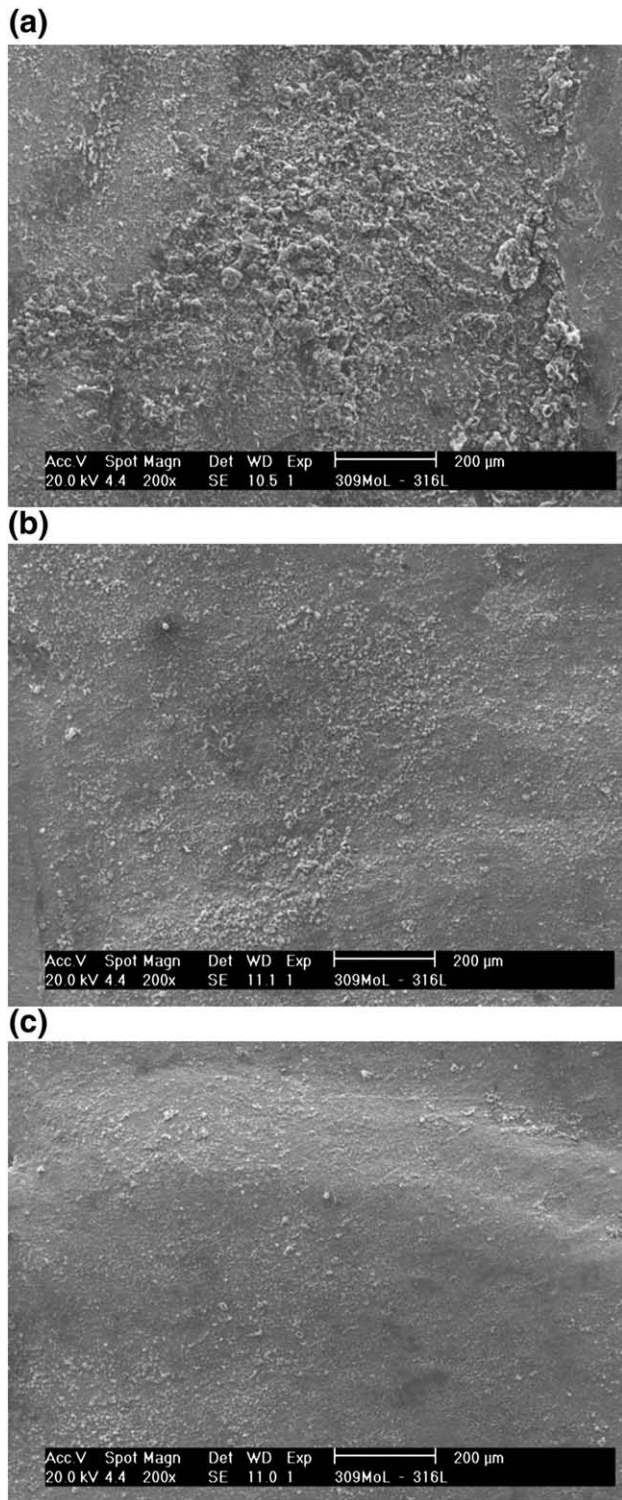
Weld metal surface after corrosion trails. (a) 6 kJ/cm. (b) 9 kJ/cm. (c) 12 kJ/cm.
